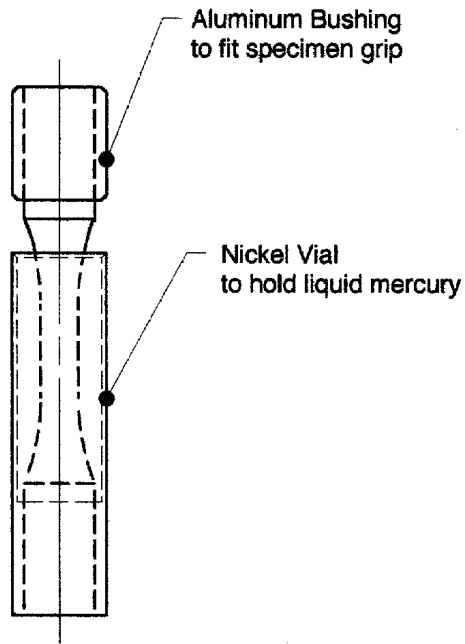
Fatigue specimen with bushing and vial for containment of mercury.
